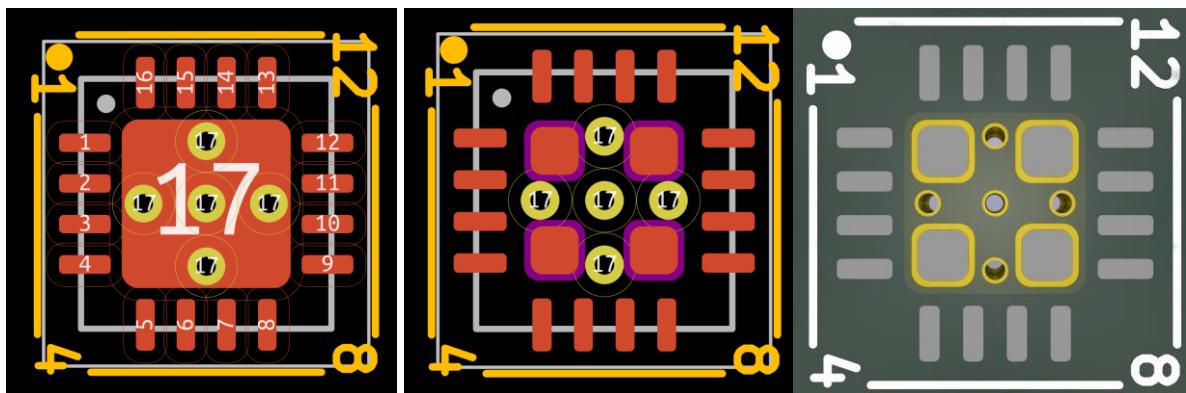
QFN-16 footprint (left), corresponding PCB view (center) and a cutaway of the PCB showing the thermal vias and the direction of heat transfer.
